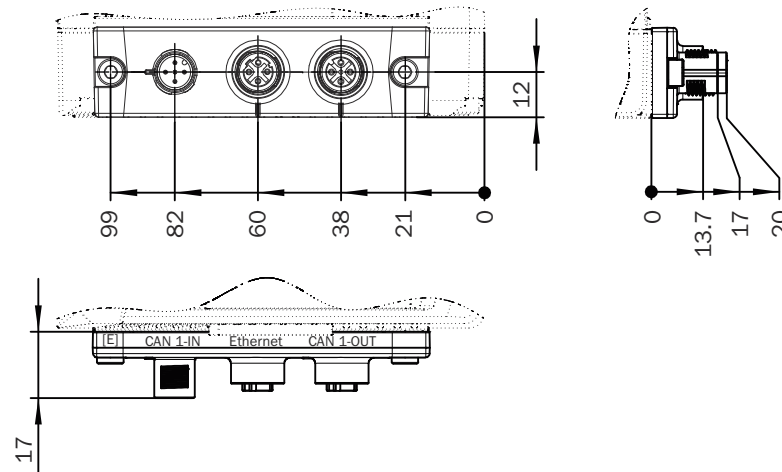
Dimensions of cloning plug E (M12), all dimensions in mm
